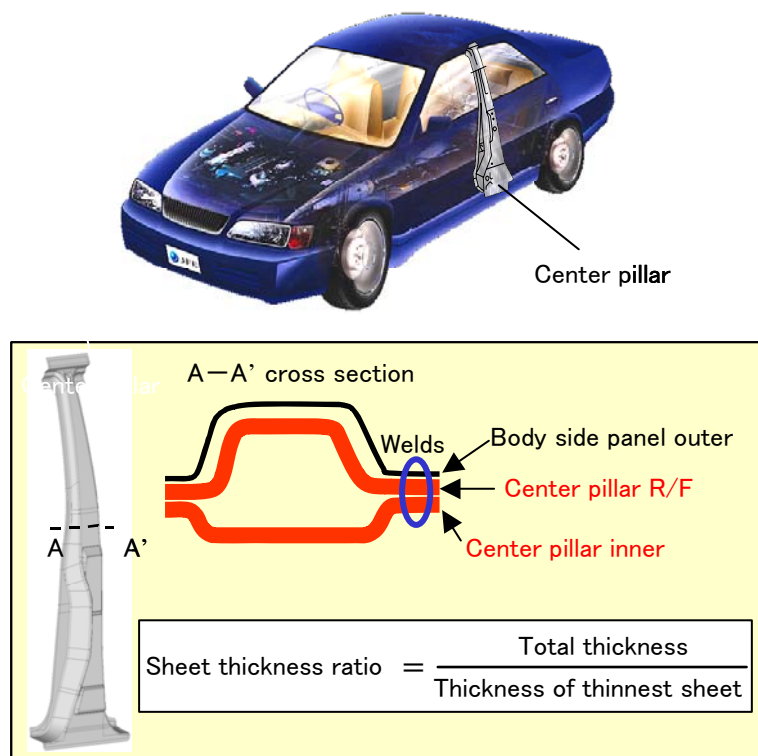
Welding part with three sheet assembly with high sheet thickness ratio.
